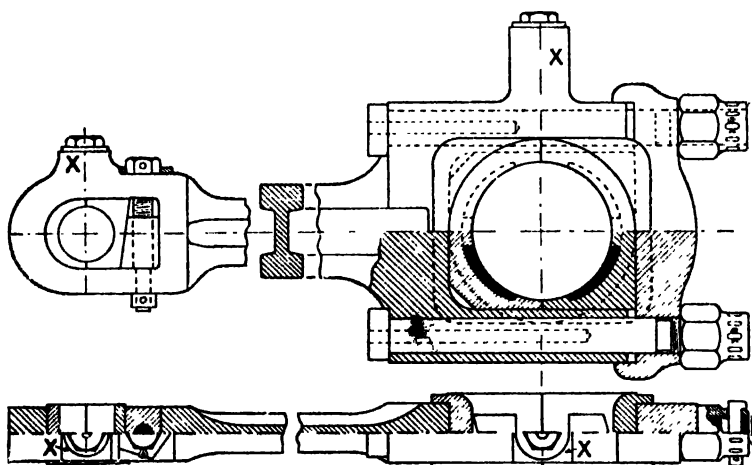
Locomotive connecting rod. (G.C.R.)
